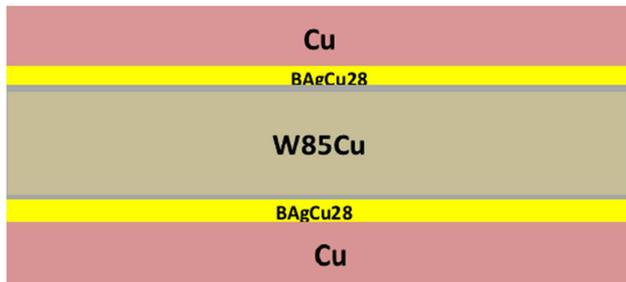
Assembly of soldered specimen of W85/Cu and Cu.
